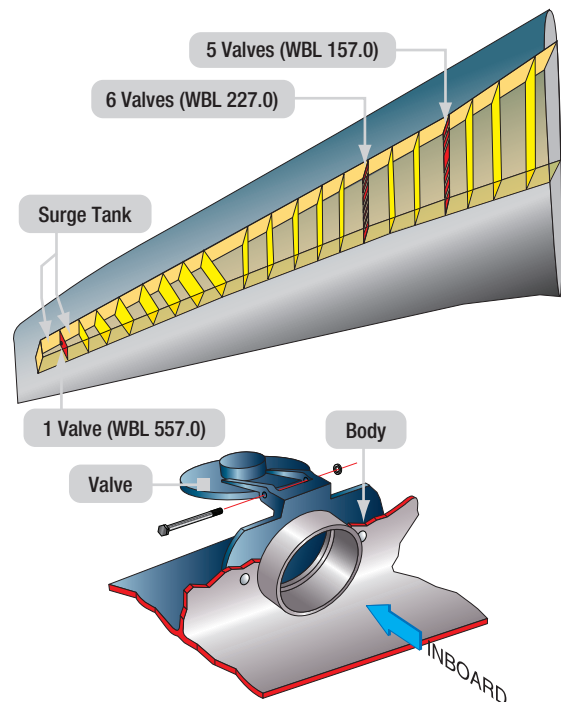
Baffle check valves are installed in the locations shown in the integral tank rib structure of a Boeing 737 airliner. Fuel is prevented from flowing outboard during maneuvers. The tank boost pumps are located inboard of WBL 157.
